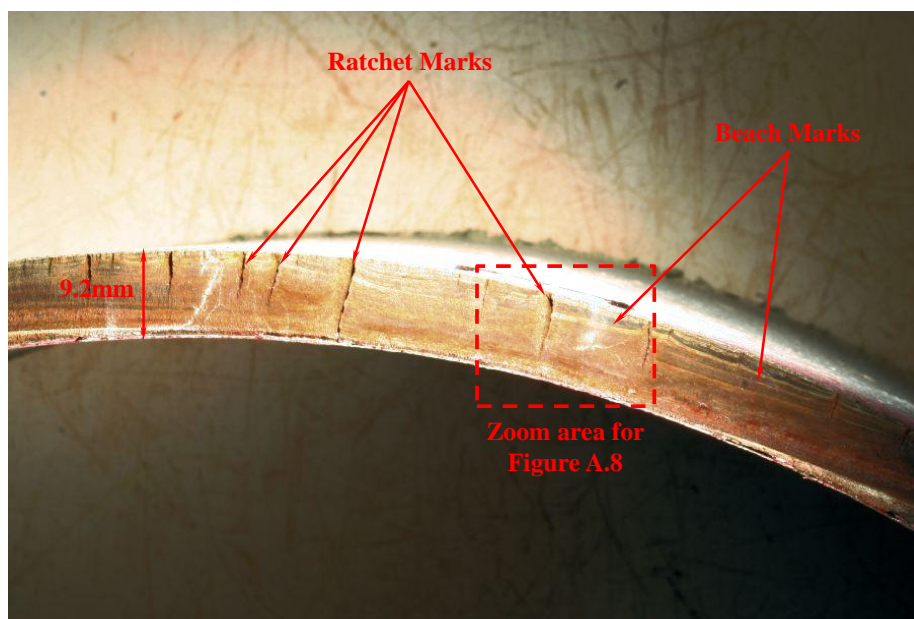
Macroscopic photograph of fracture surface from S-61-0001 displaying multiple ratchet marks and beach marks.
